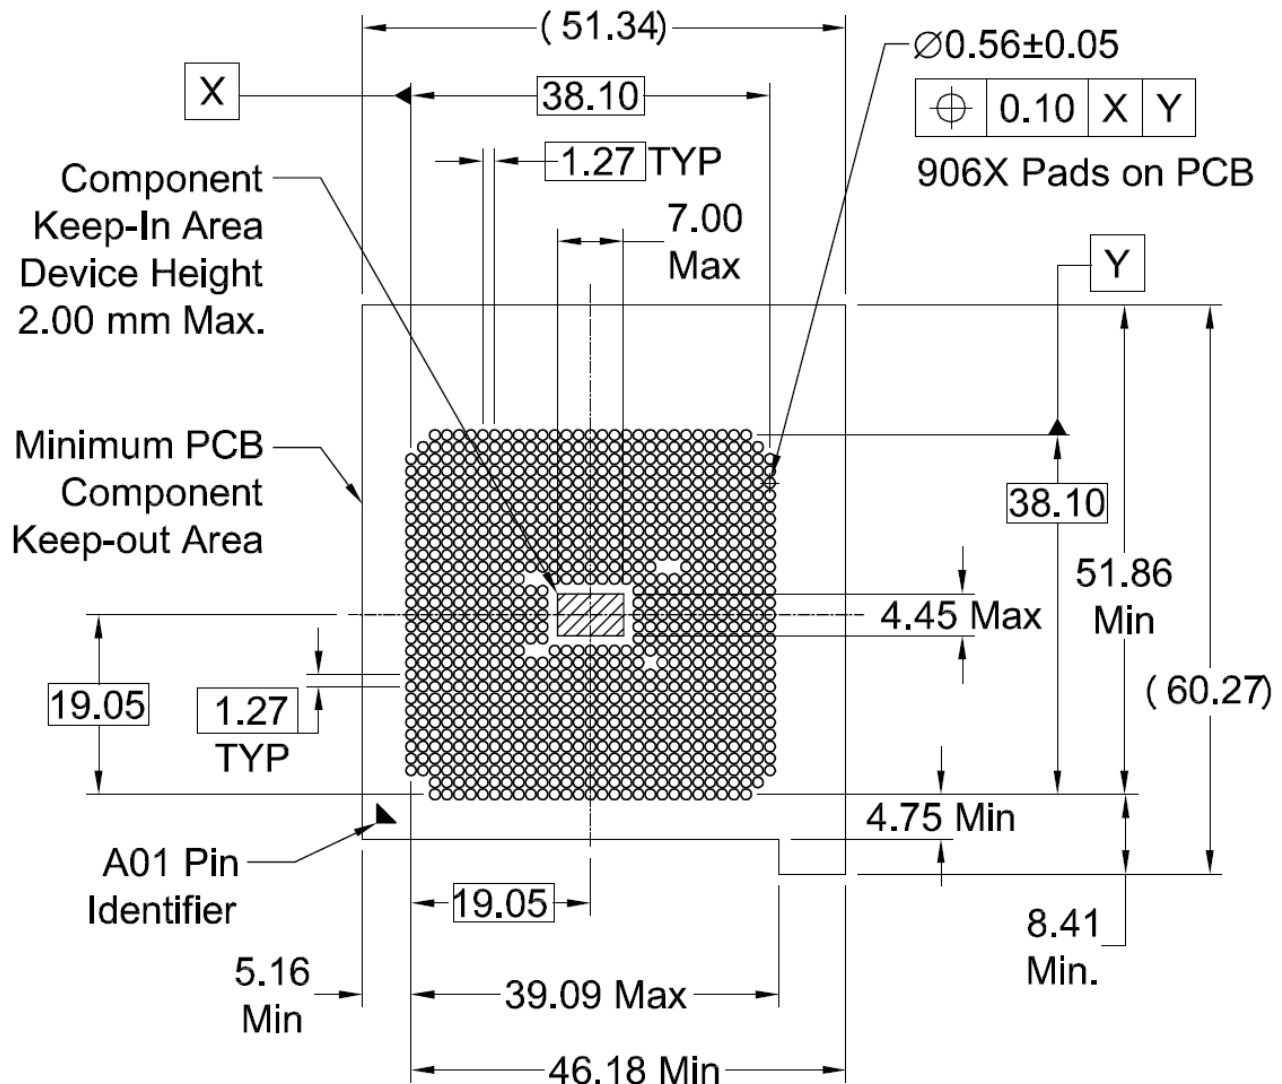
Allowable PCB Component Keep-In, Keep-Out Area
